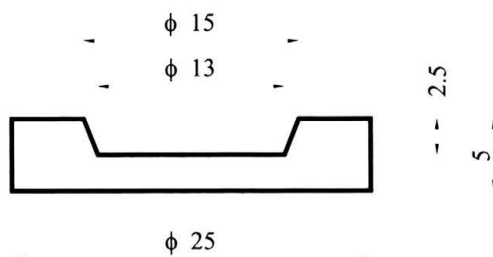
Geometry of the formed piece (dimensions in mm).
